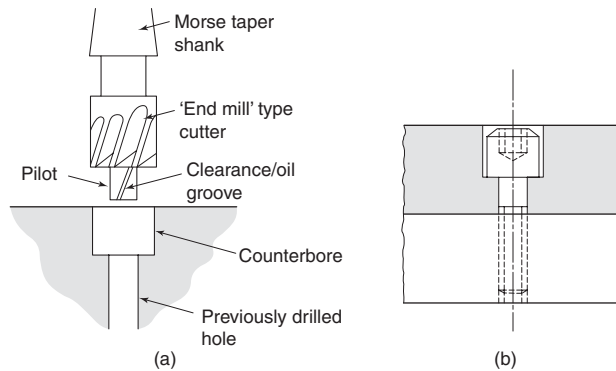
Counterboring: (a) cutting a counterbore; (b) cap head screw recessed into a counterbore
